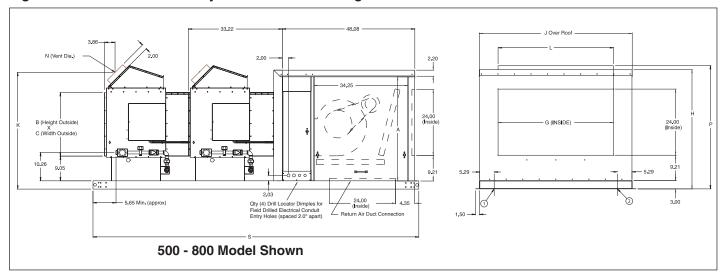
DCG Indoor Gravity Vented Cooling Package Unit Dimensions
